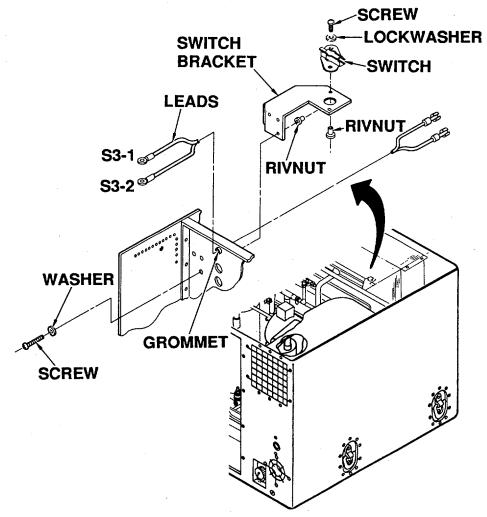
Heating Cutout (Thermostat) Switch (S3)
